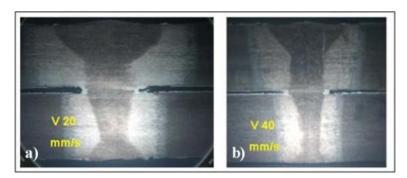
RLW joints welded with CO₂ laser at CLUPM: USIBOR 1500+ALUSI, defect-free welds achieved at two welding speeds (20 and 40 mm/s), keyhole mode.
